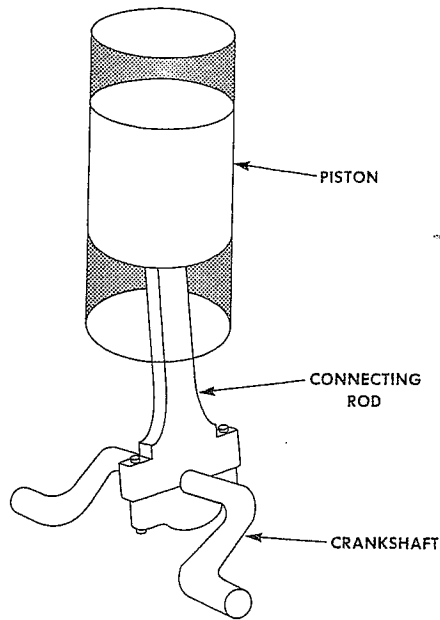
The connecting rod is connected to an offset shaft called the crankshaft.
